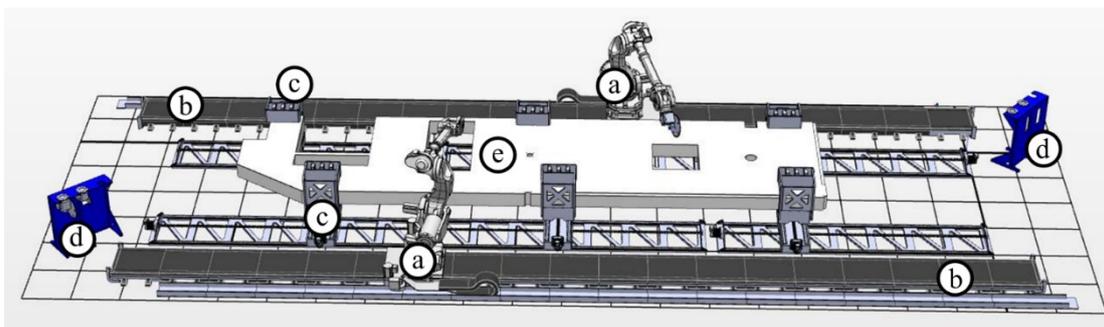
Automated robotic machining cell for cross-laminated timber panels: (a) Robot ABB® IRB 7600; (b) Track motion ABB® IRBT 7004; (c) Flexible clamping System; (d) Tool stand; (e) CLT Panel for reference.
